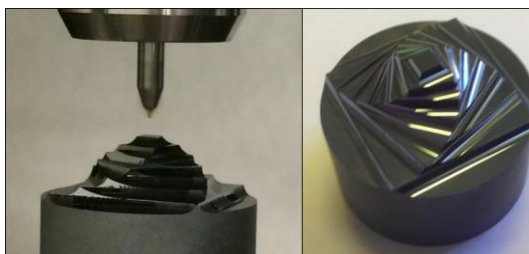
Ball milling of a severe freeform surface in IRG26.
